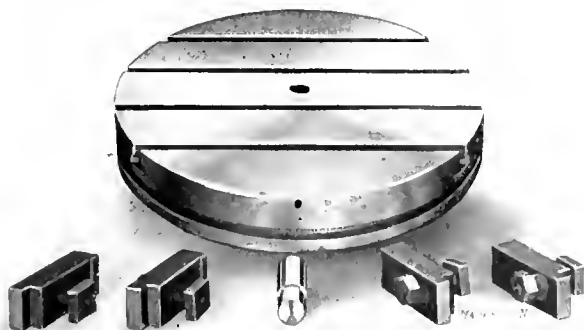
Rotary Table used on the Horizontal Boring Machine
